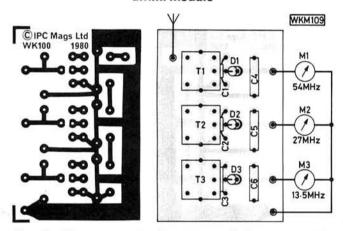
The copper track pattern of the wavemeter p.c.b. shown here full size. Fig. 6 (above right): The component placement drawing of the wavemeter p.c.b. Ambit International will be able to supply ready built and aligned boards for those constructors without the necessary gear
